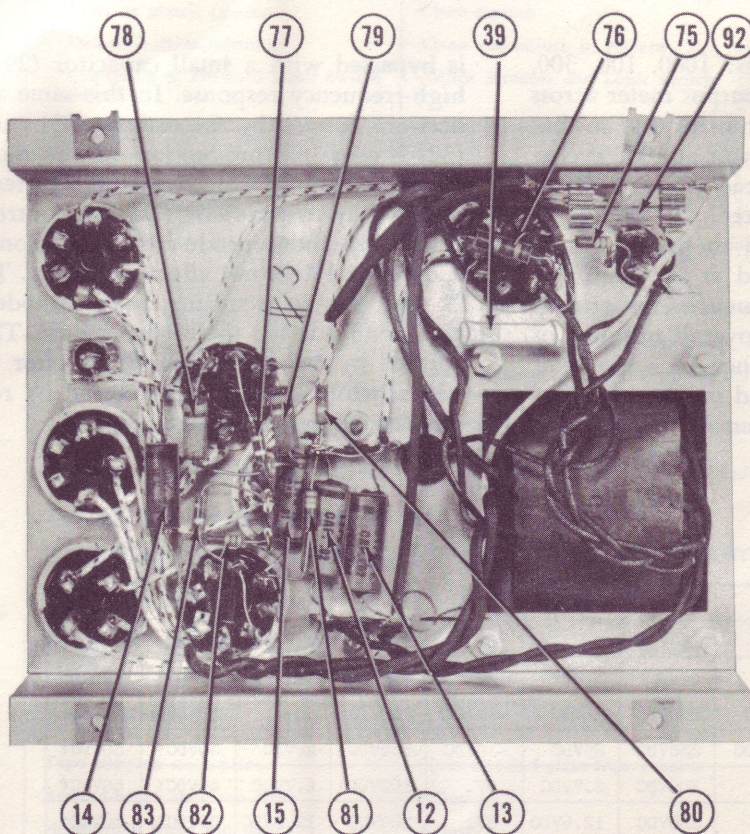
AMPLIFIER CHASSIS BOTTOM VIEW
